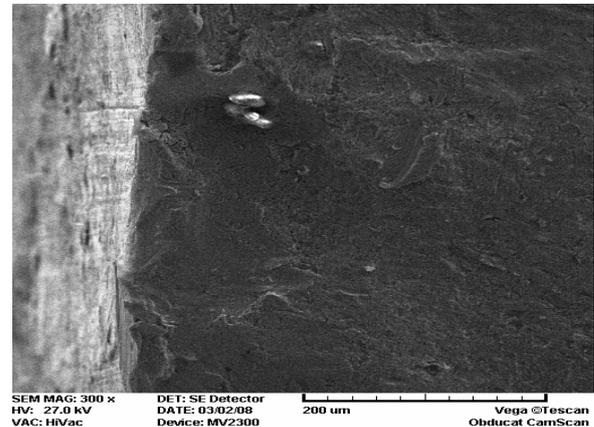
fracture surface containing a high amount of debris particles.
